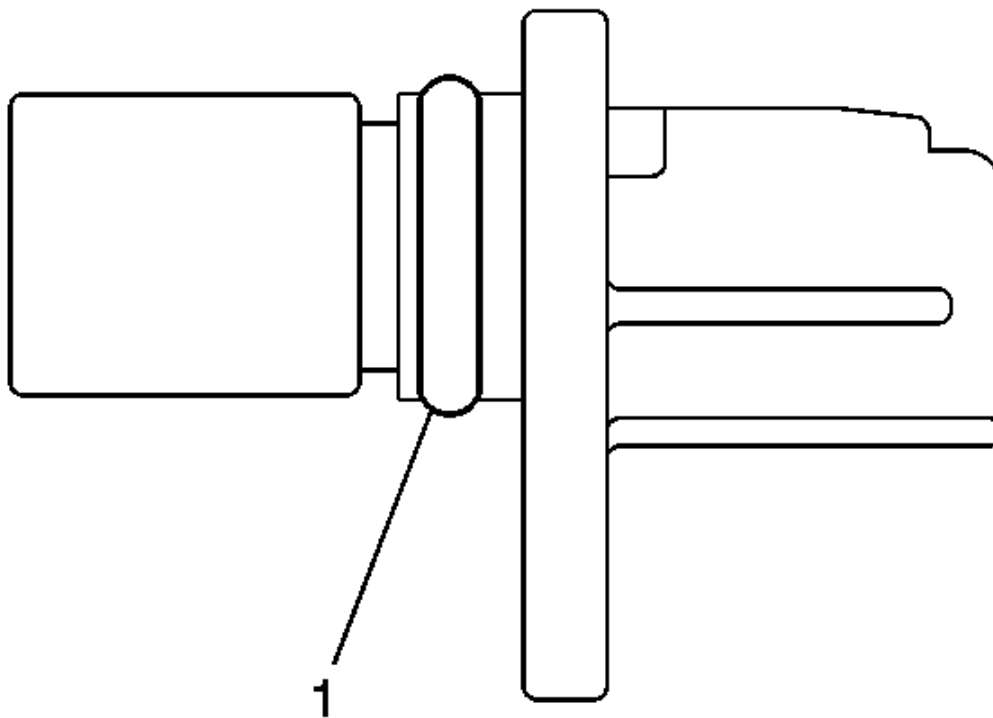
Identifying Camshaft Position Sensor & O-Ring
